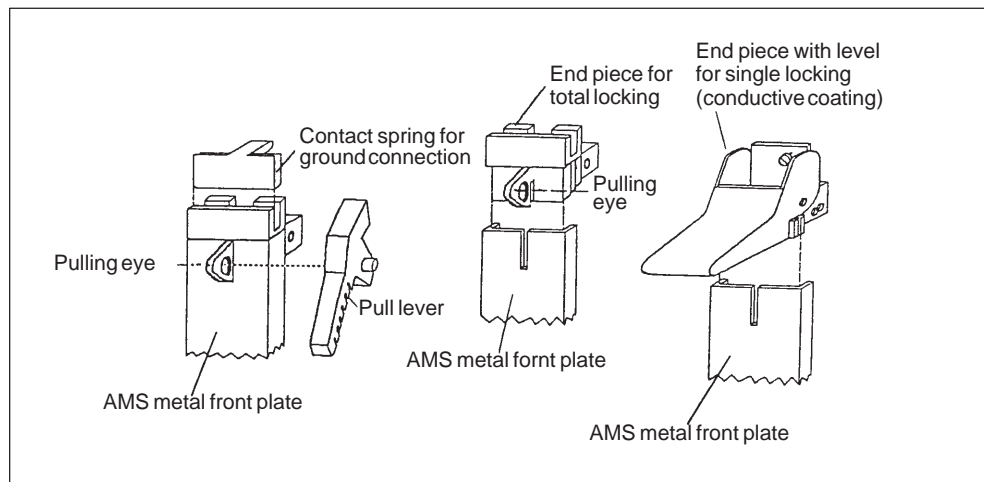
Previous design of front plate end pieces for total and single locking mechanism
